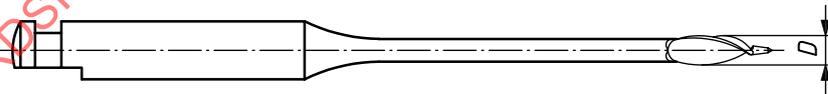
Dimensions and locations for Type 5 (shape instrument: arc shape)
